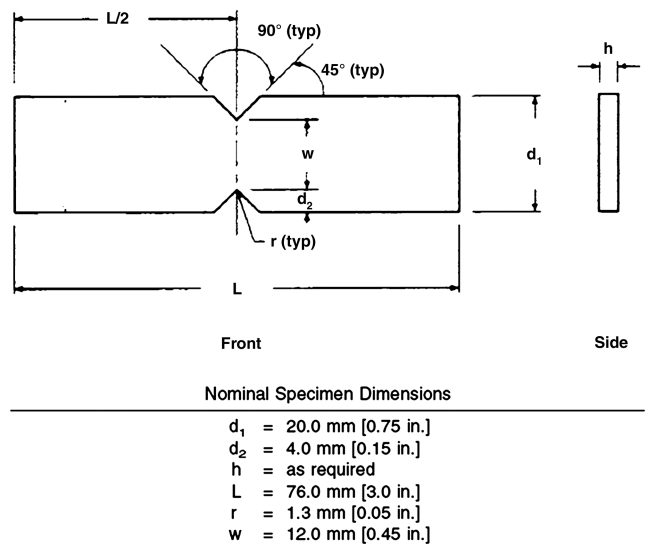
ASTM D5379 [14] V-notched beam specimen.
